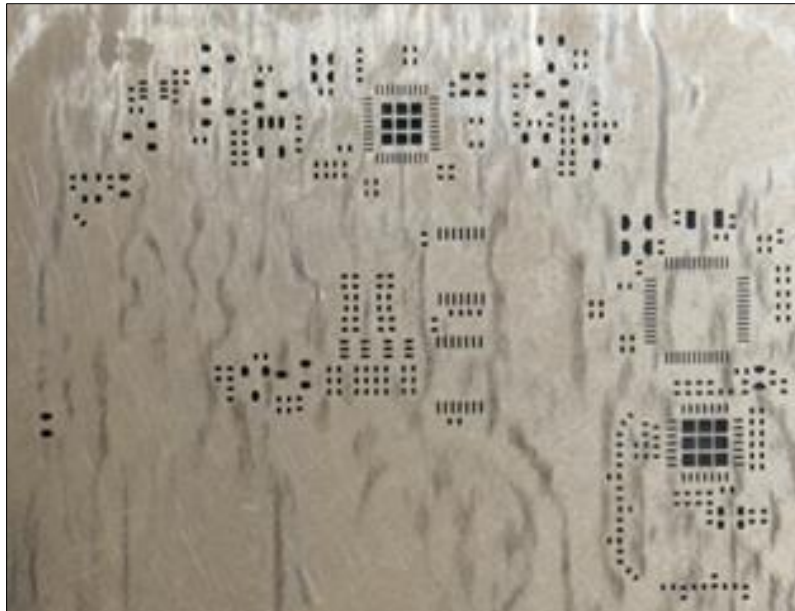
Printing Circuit Board (PCB) placed in the precise grip of the SMT printing machine, ensuring an ideal fit between the *template* and the application of the solder paste. (Image generated by AI model *Imagen 3*)
